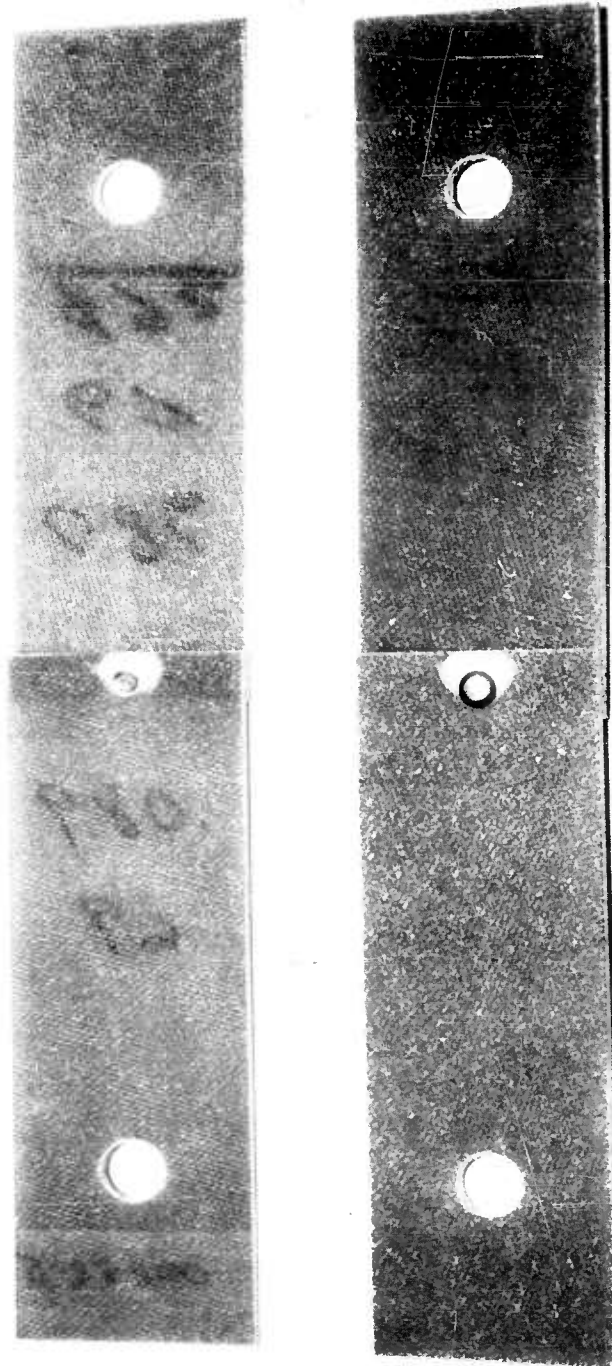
TYPICAL BEARING FAILURES EXHIBITED
